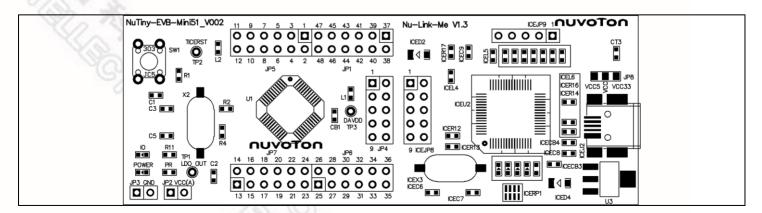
NuTiny-SDK-Mini51 PCB Placement
